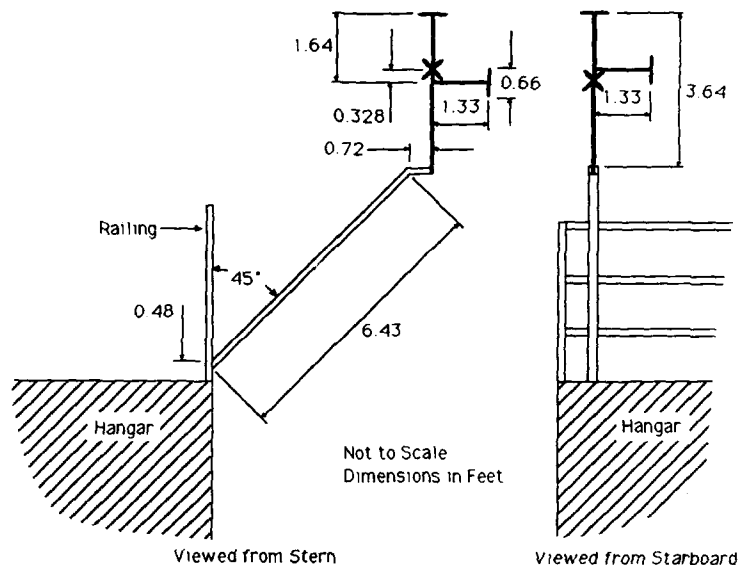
Starboard Gill Anemometer Array and Mounting Bracket
